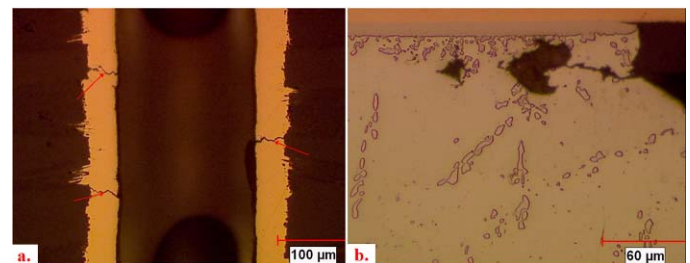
BGA failures after 0 to 100°C ATC a) failure in board material by via plating crack and b) partial failure through bulk solder (SAC305) near component side IMC
